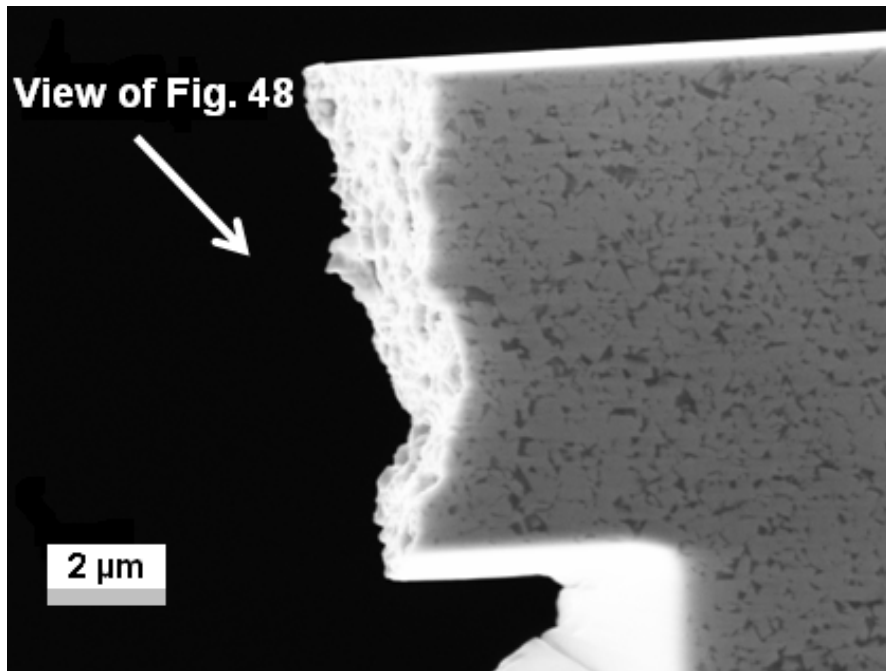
Side view of fractured sample of geometry S4 made of hard metal grade X9 [91]
